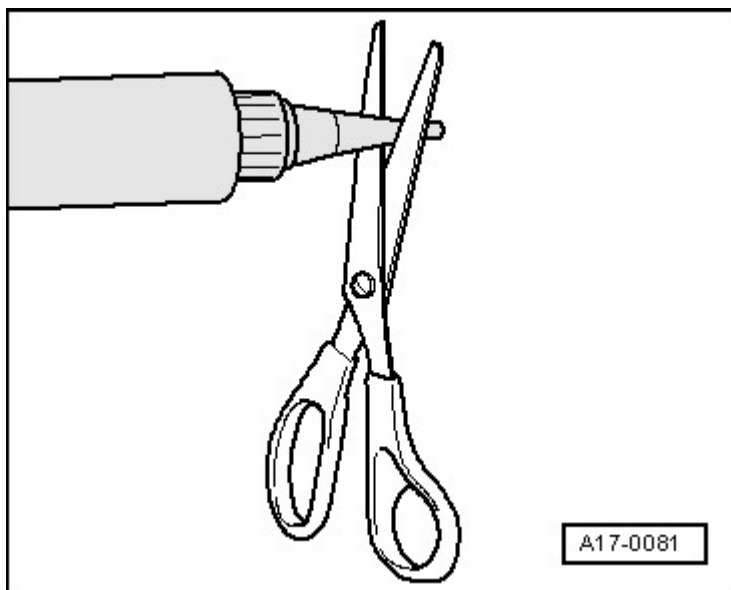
Cutting Tube Nozzle At Front Marking (Nozzle Diameter Approx. 2 mm)
